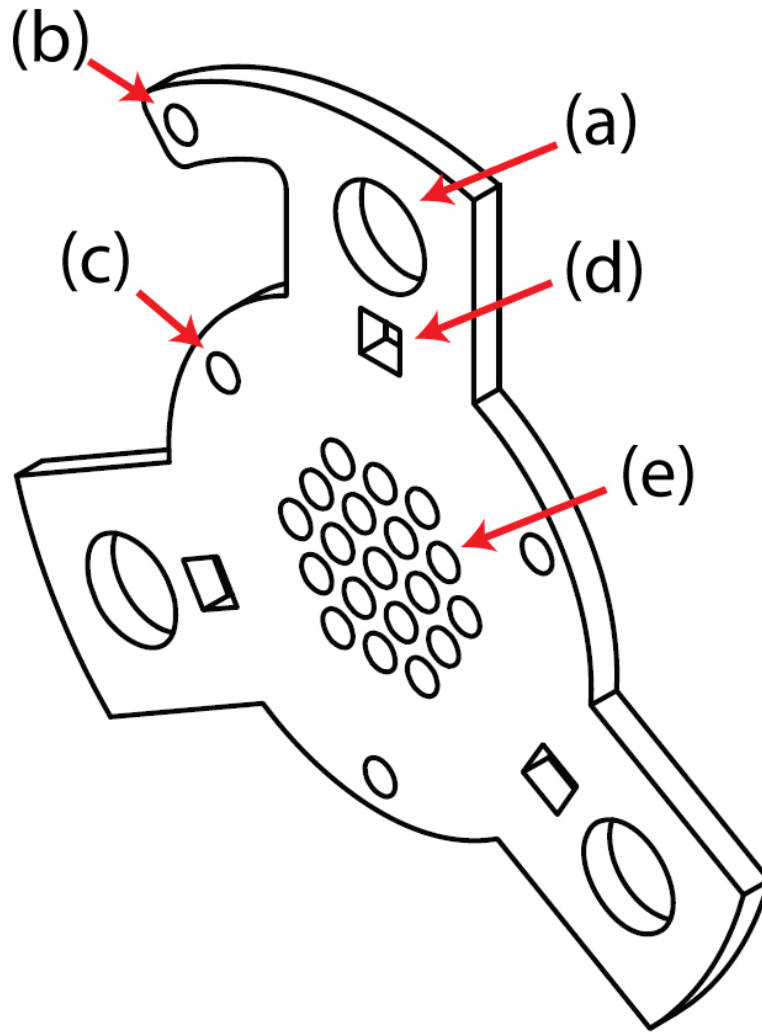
CAD drawing of a ring electrode showing (a) #4 mounting screw holes, (b) solder tab, (c) 1 mm diameter holes for alignment pins, (d) optical alignment verification features, and (e) array of CIT holes.
